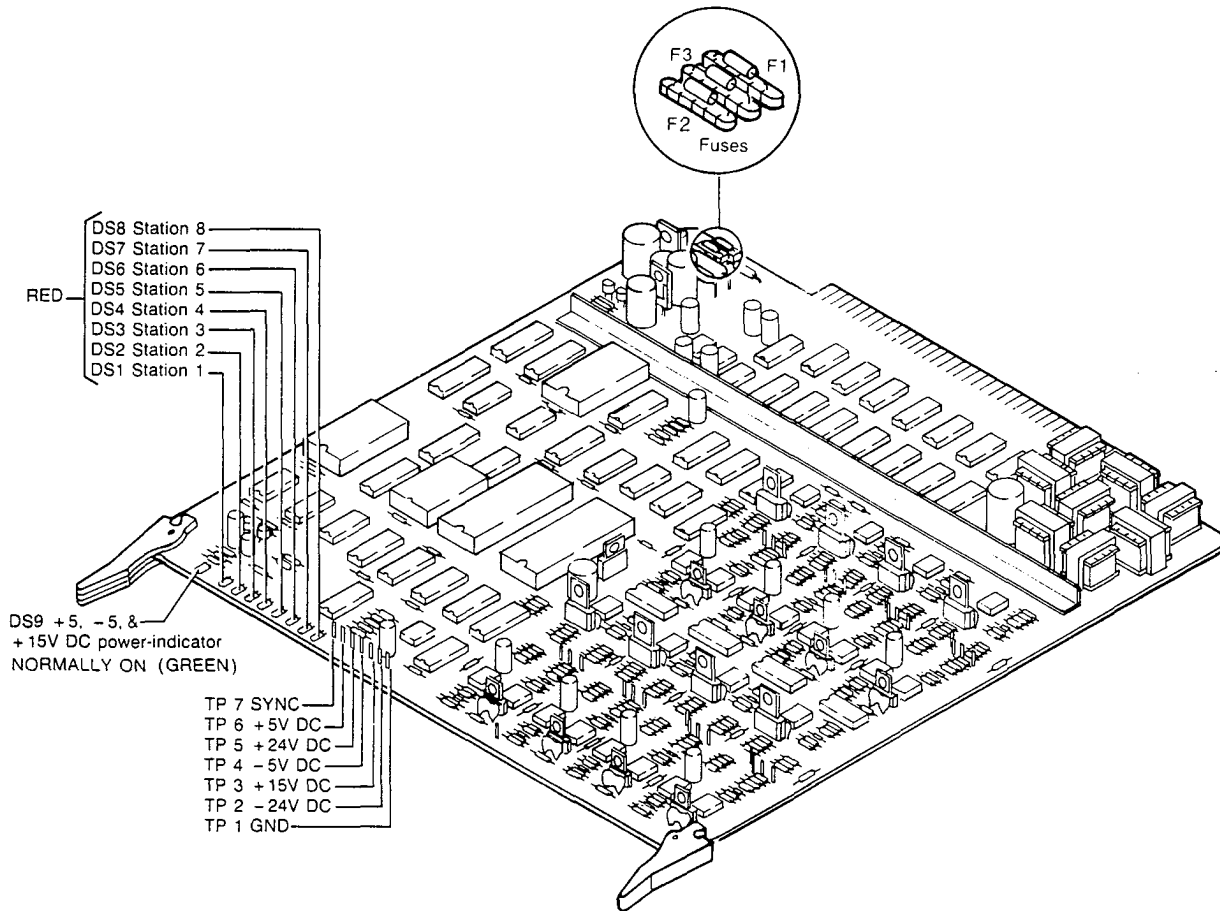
TONE GENERATOR (B-TGU-C) PCB.
